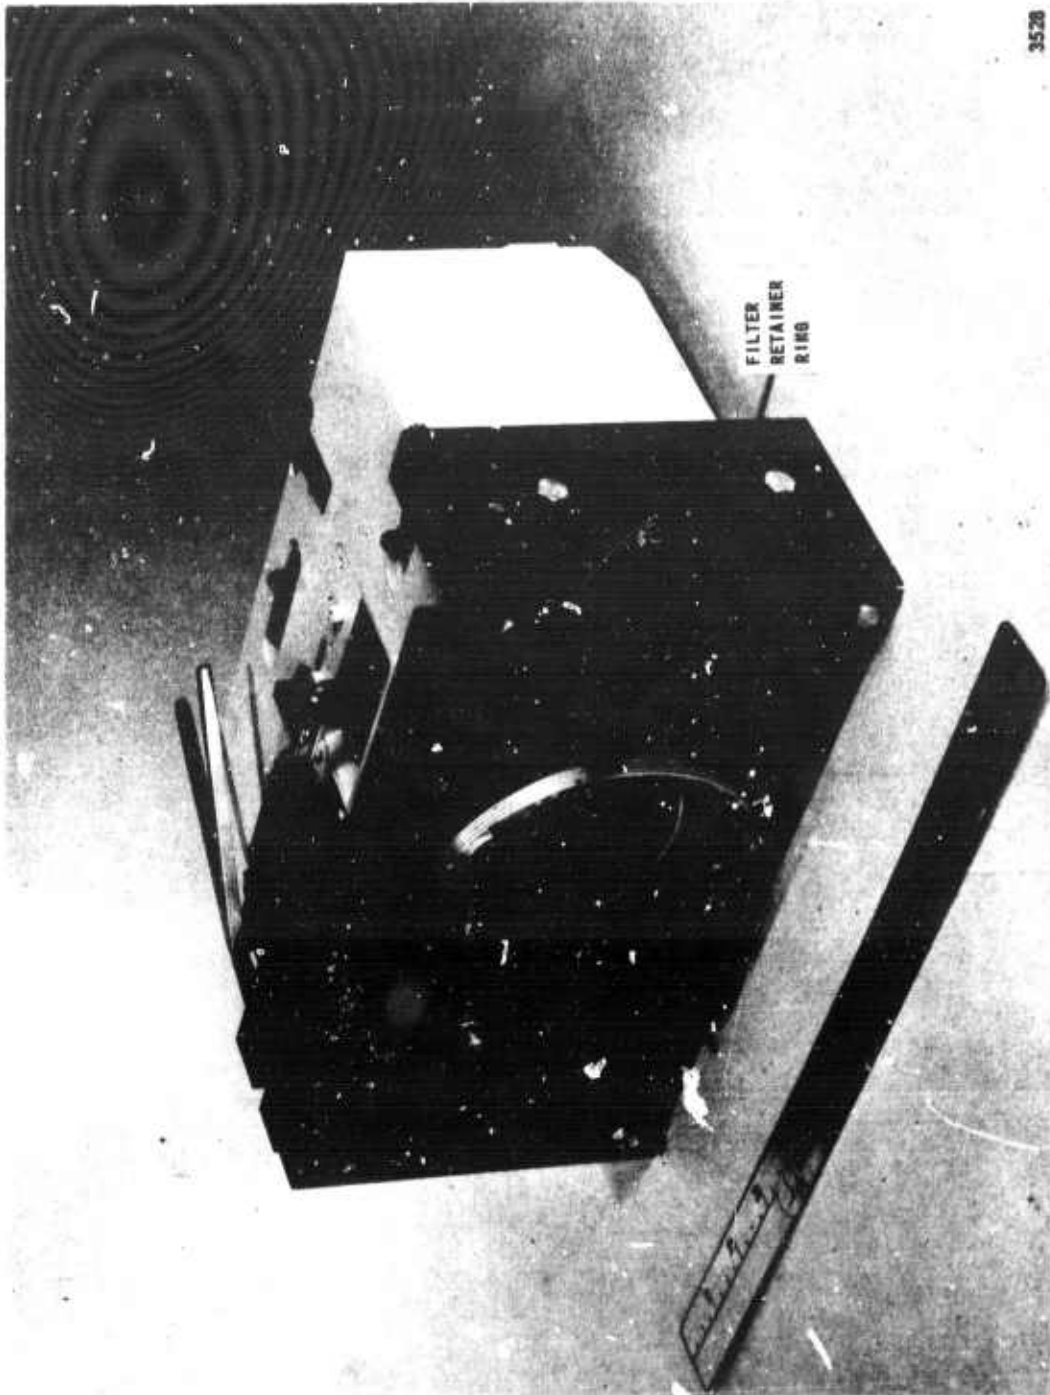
KA-61 CAMERA MOUNTING BRACKET, BOTTOM VIEW
